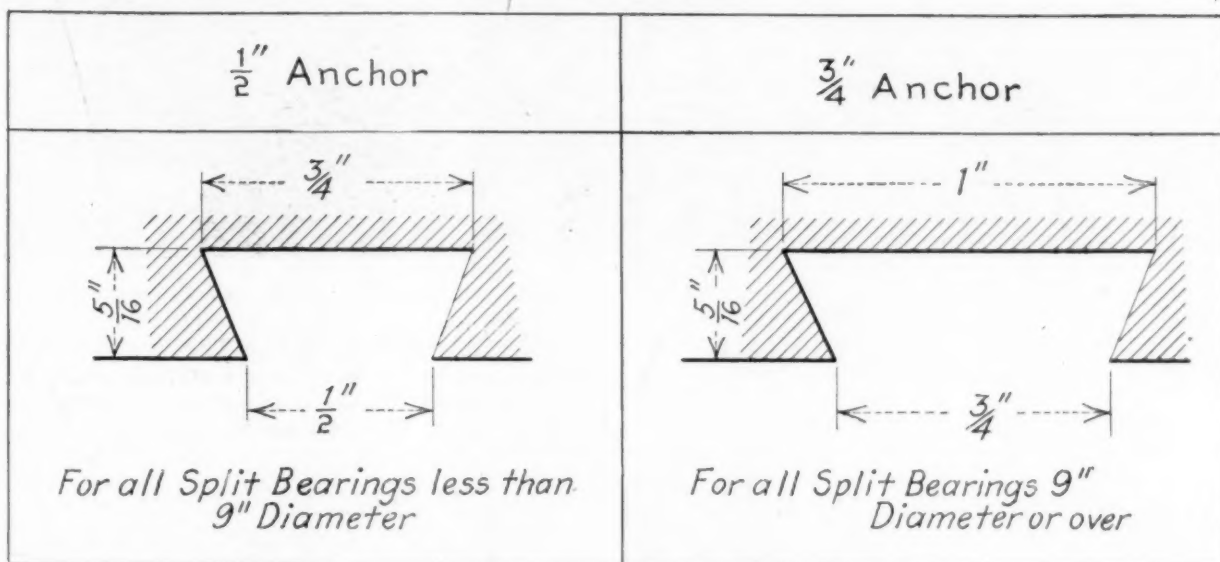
SHOWING TYPES OF ANCHORS USED TO HOLD BABBITT FROM FLOWING IN BEARINGS.
